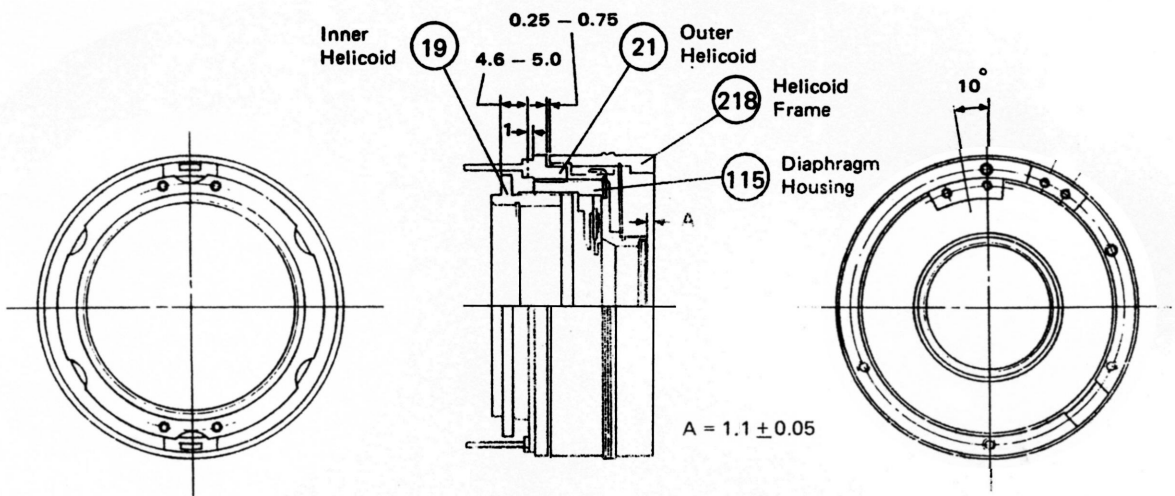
Helicoid Assembly Critical Dimensions, Minolta Mount
